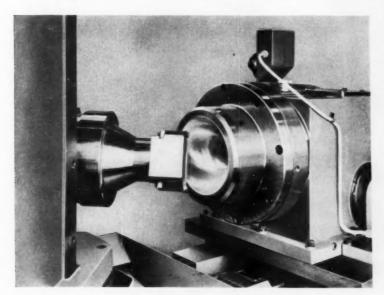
Close-up of cutter-head of machine shown in Fig. 1 and part mounted in vacuum chuck
